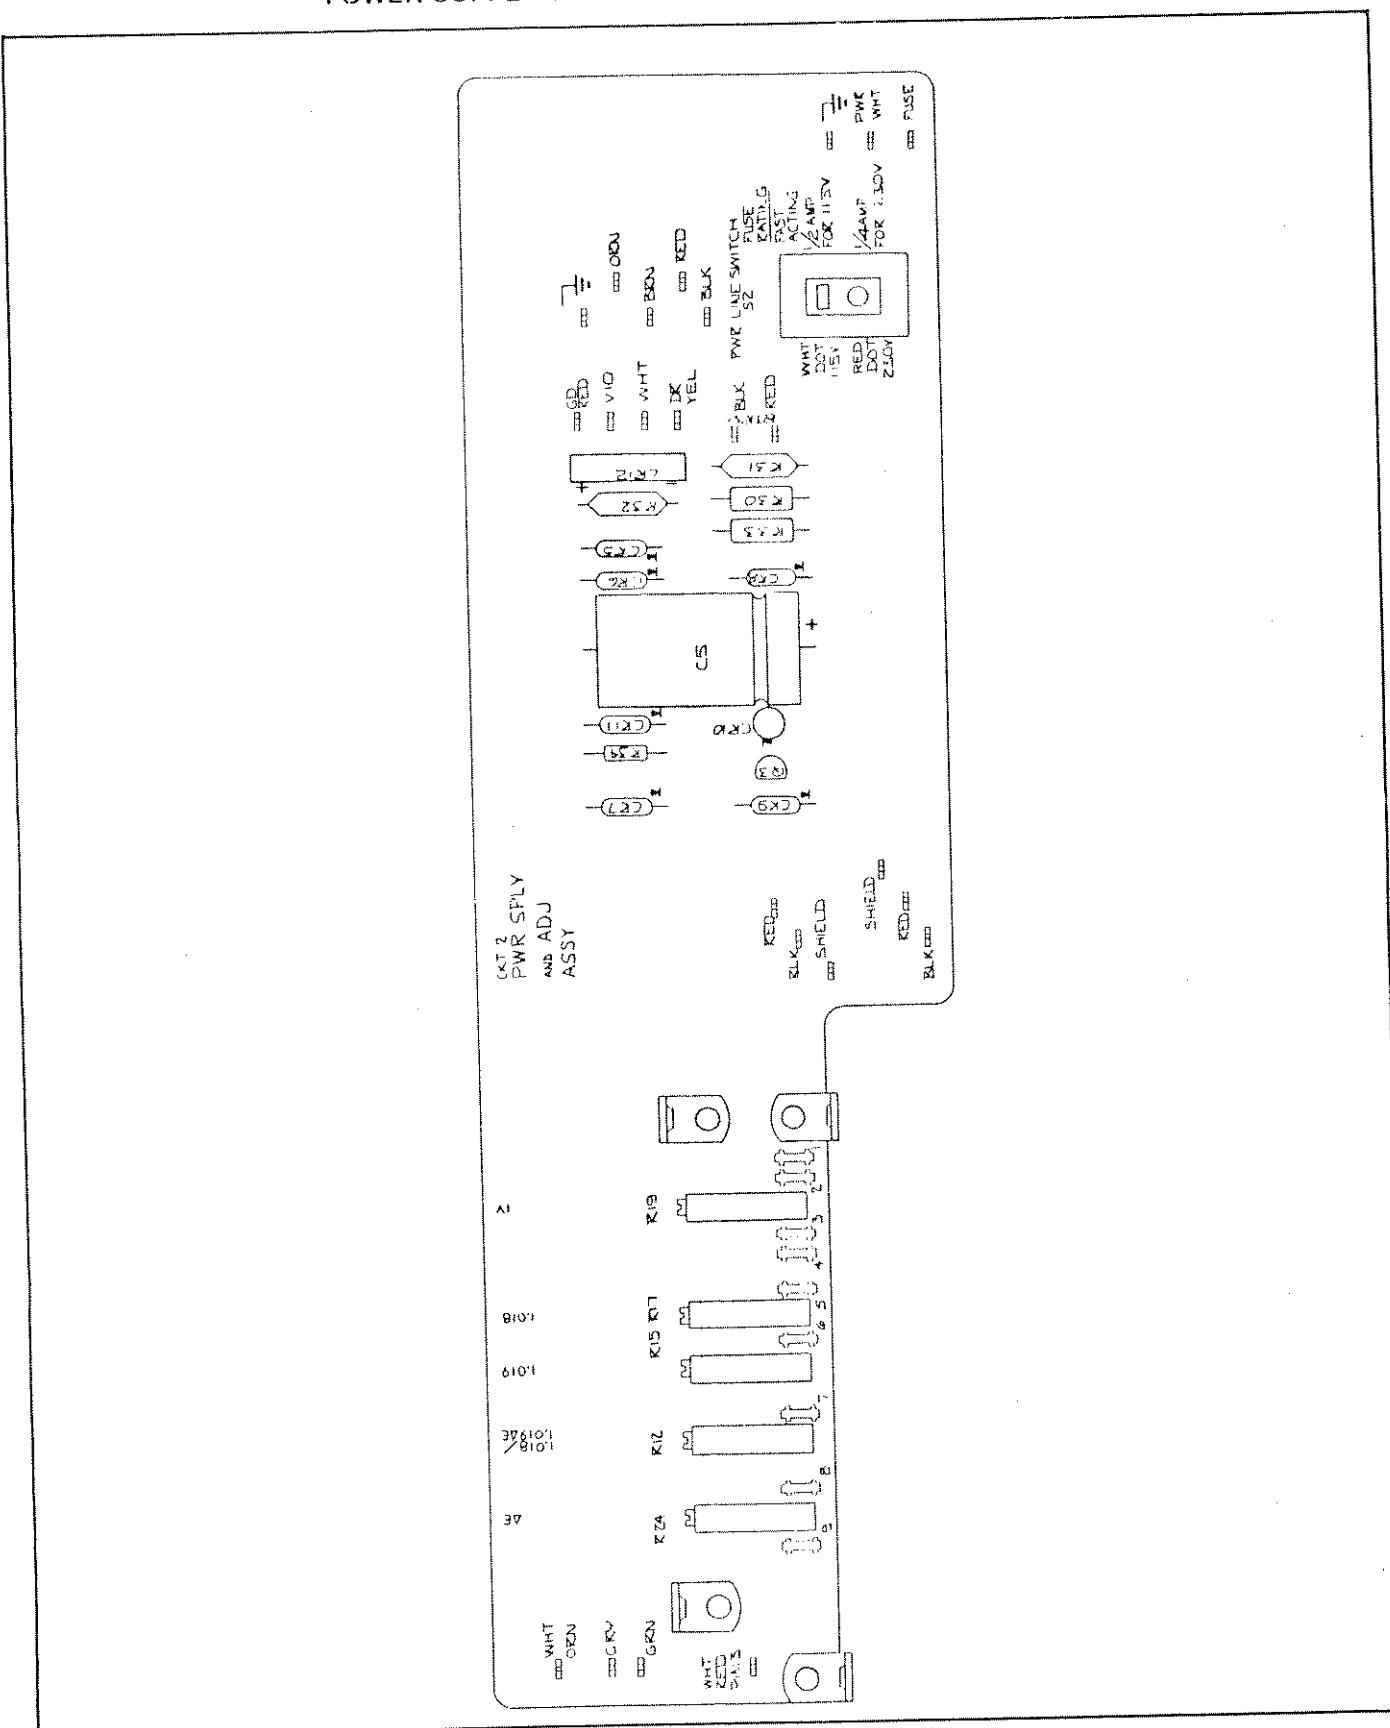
POWER SUPPLY AND ADJUSTMENT PCB ASSEMBLY.
